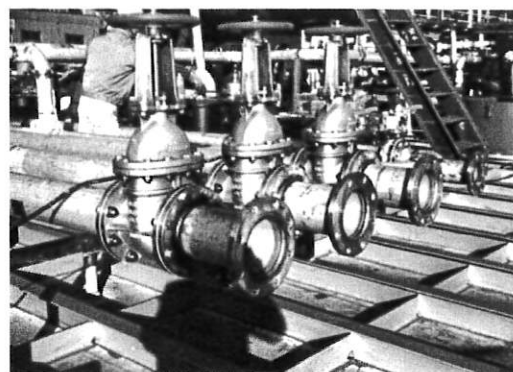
An application of DW-316L for fillet welding of the pipe fittings and pipelines equipped on the bridge and in the cargo tanks of a chemical tanker.
